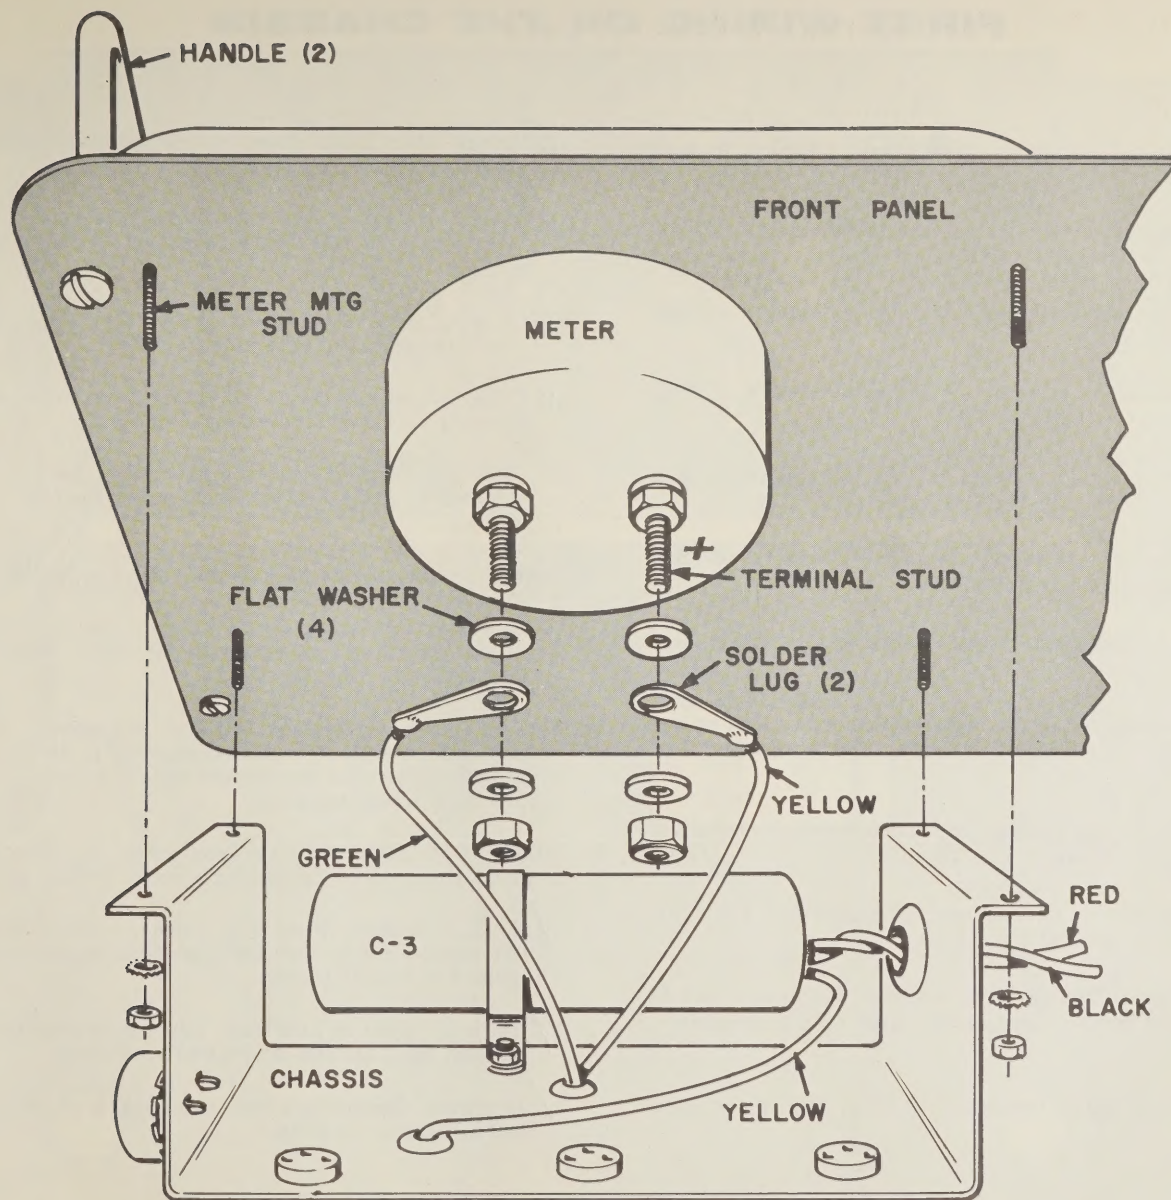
MOUNTING THE CHASSIS TO THE DRESS PANEL
